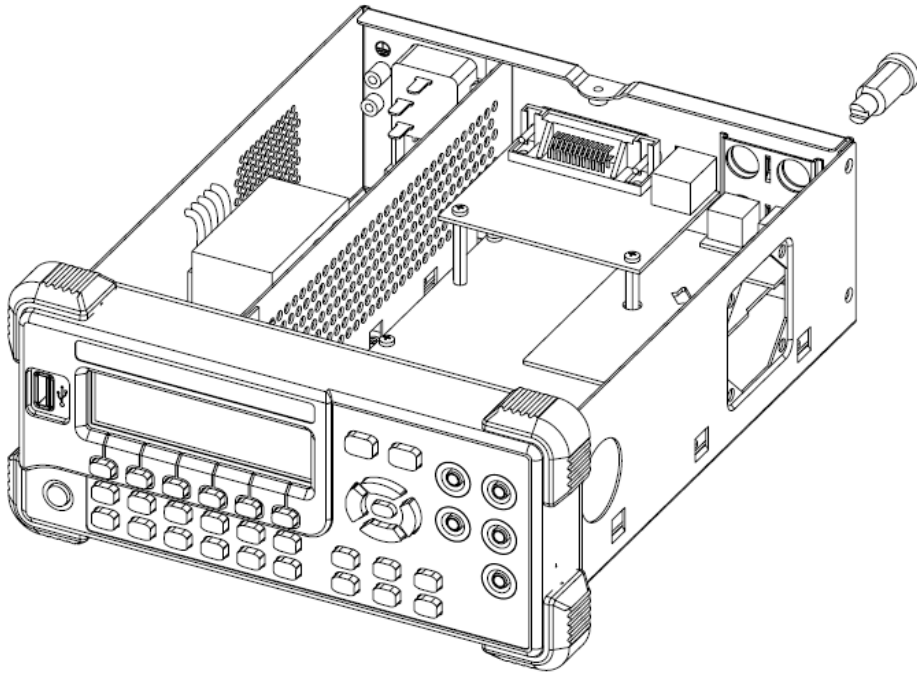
The Schematic of Disassembling and Assembling Fuse Socket
